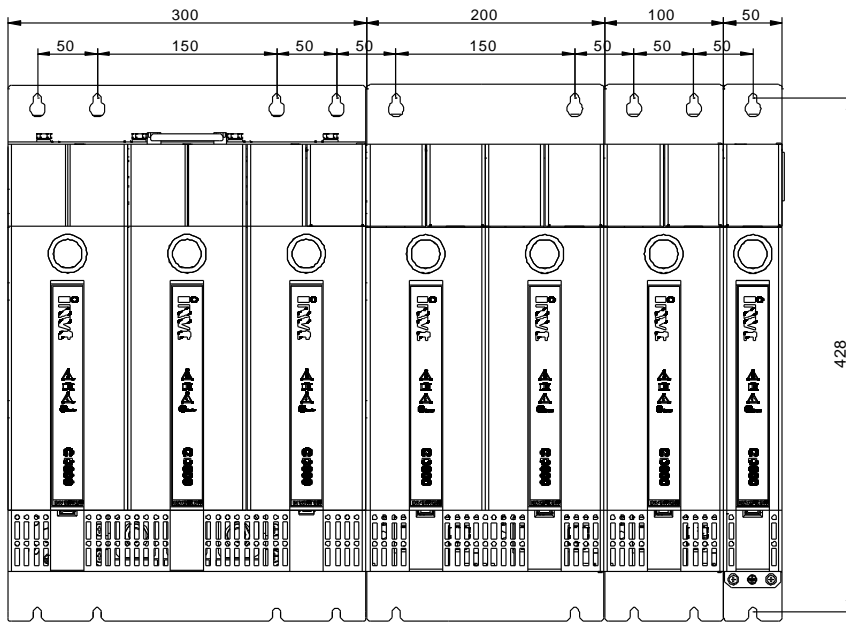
Flange installation drawing for the 380V rectifier and inverter units
